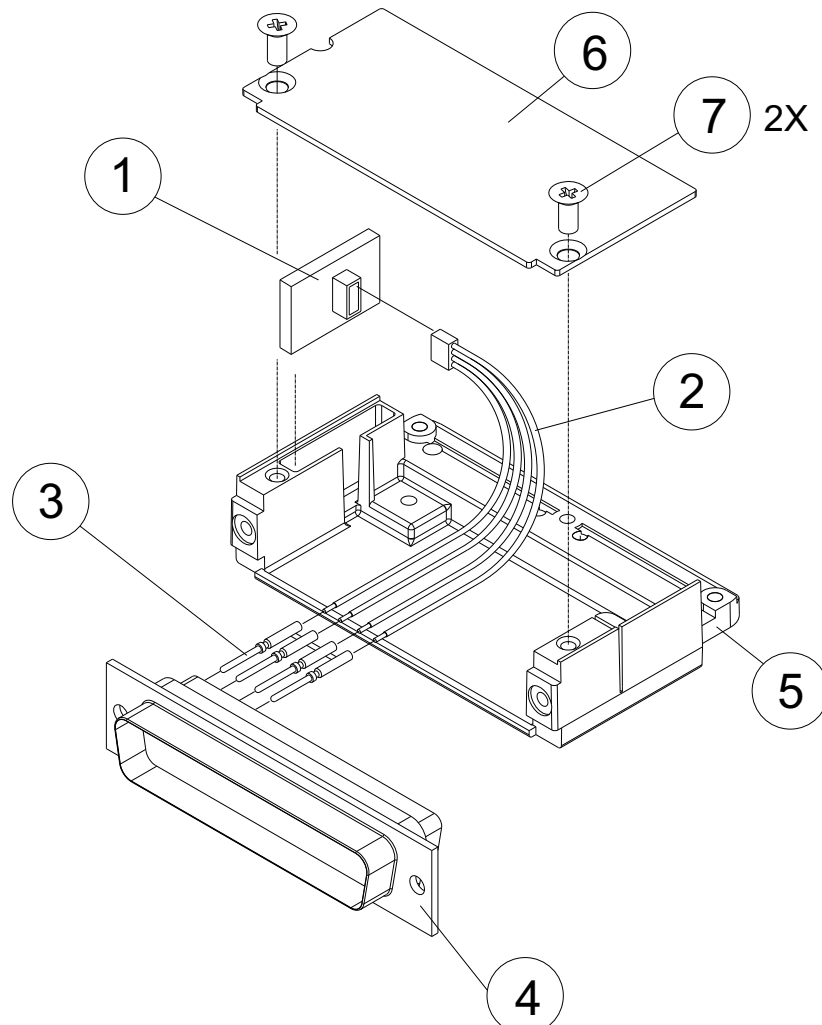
Backshell Assembly (Potted Configuration Module)
